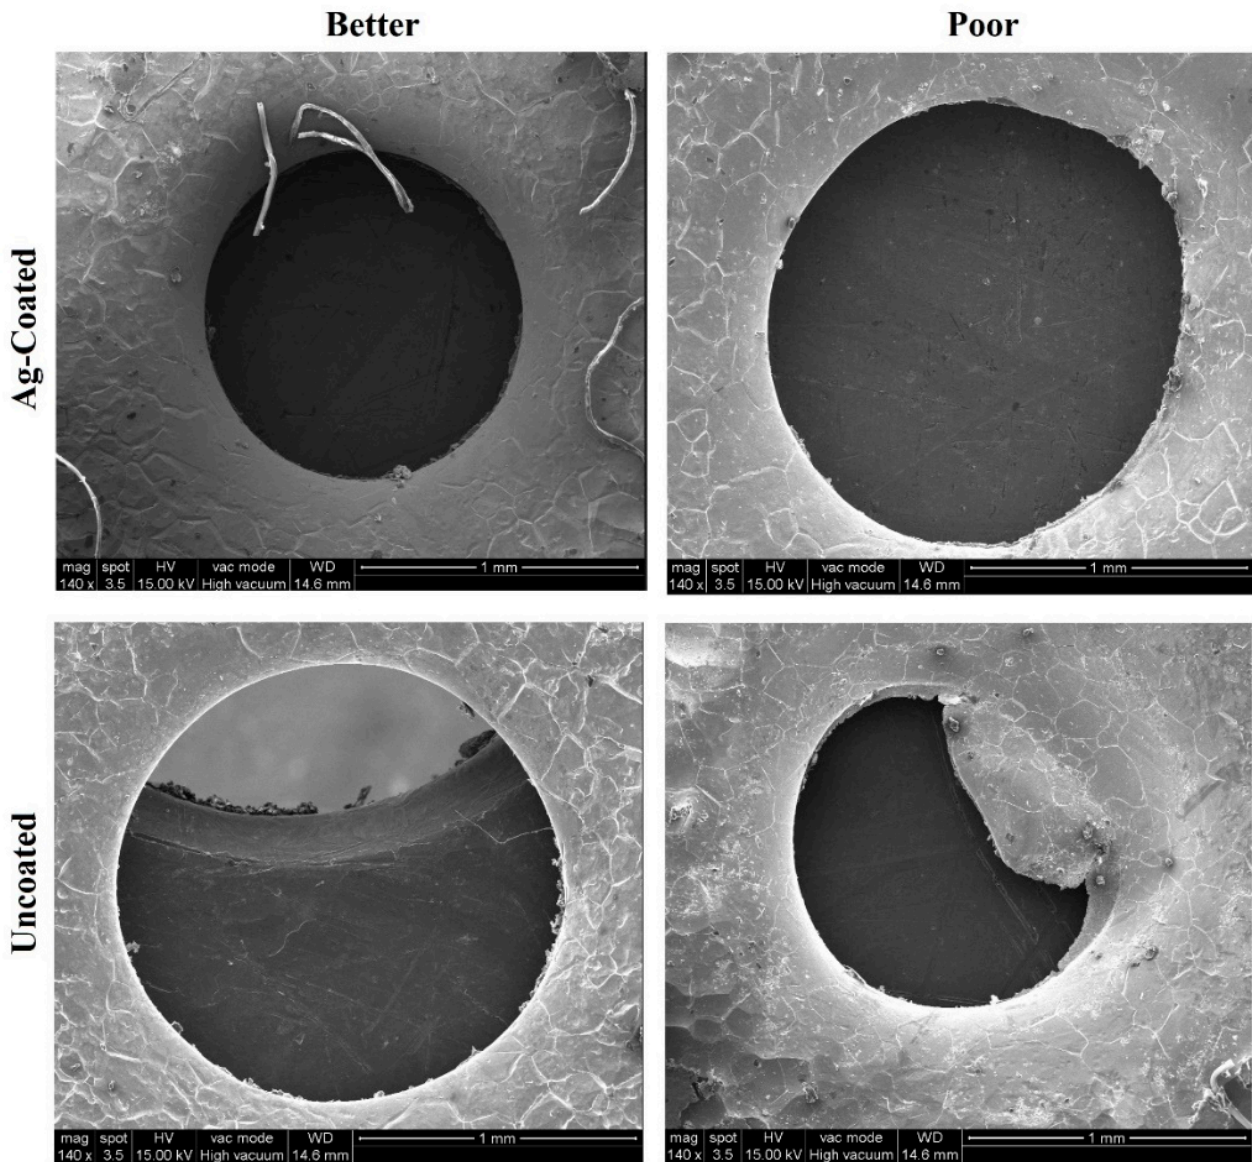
SEM Image of Machined Coated and Uncoated Workpiece.
